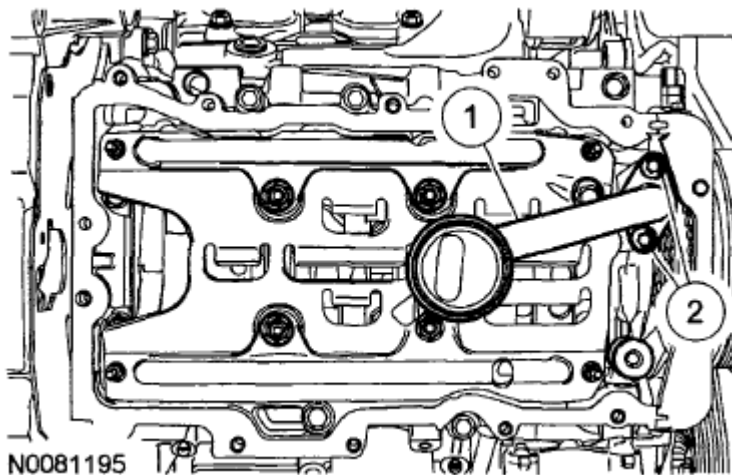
Identifying Oil Pump Screen And Pickup Tube Bolts
